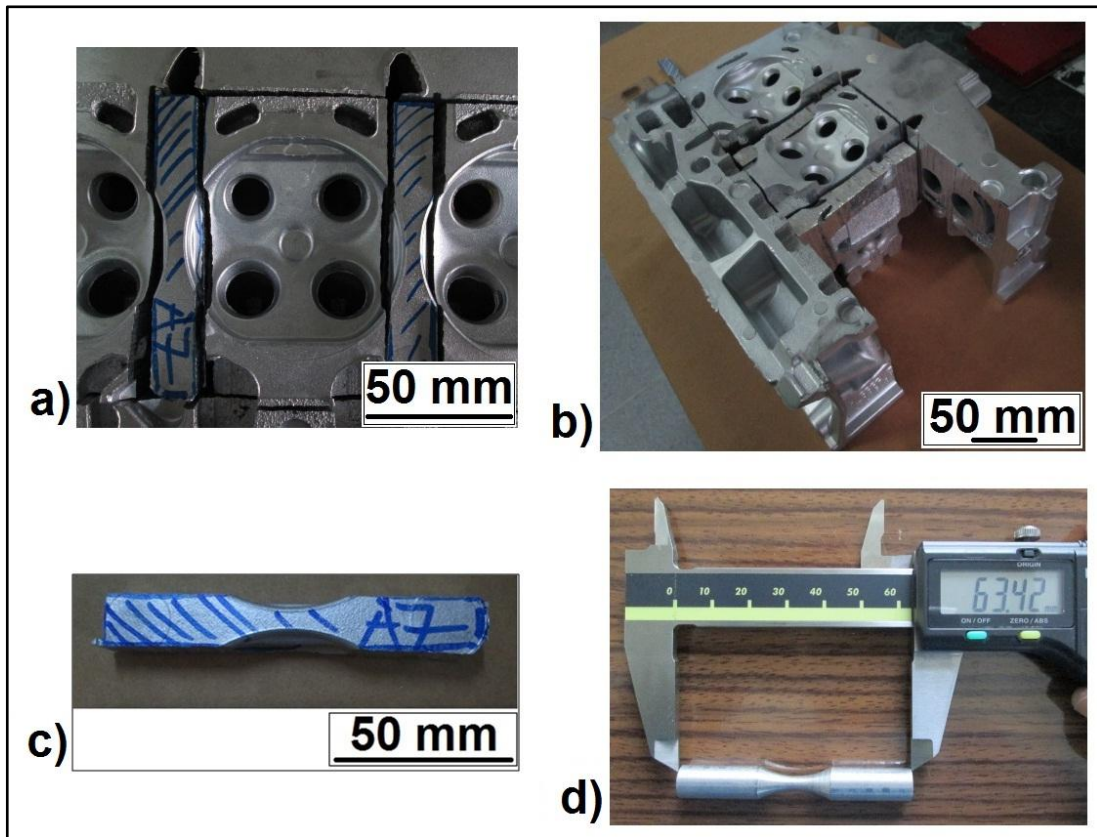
a) Combustion chamber and specimen region, b) Perspective view of cylinder head, c) Sawed specimen, d) Machined fatigue specimen.
